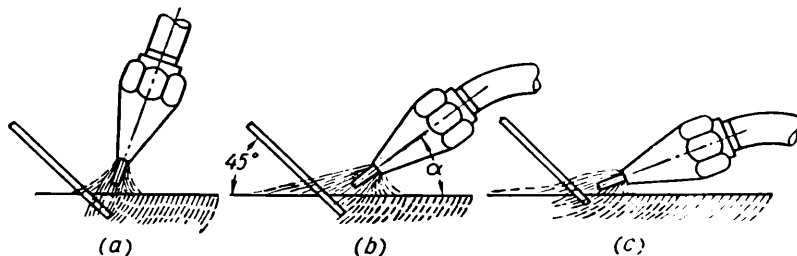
Torch angle in the various stages of a welding operation:
